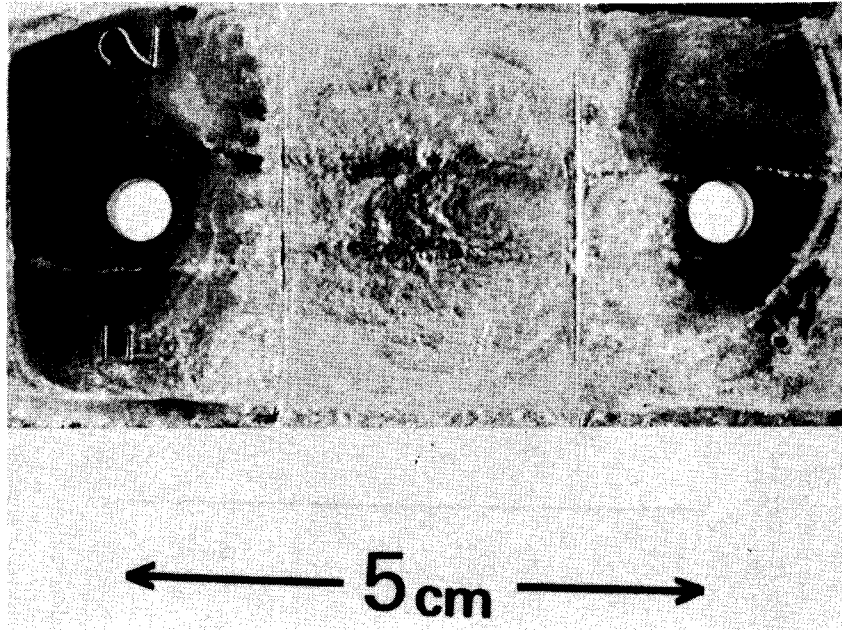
Welded niobium modified 70/30 copper nickel sample showing attack along weld pass interfaces after 1644 hours exposure.
